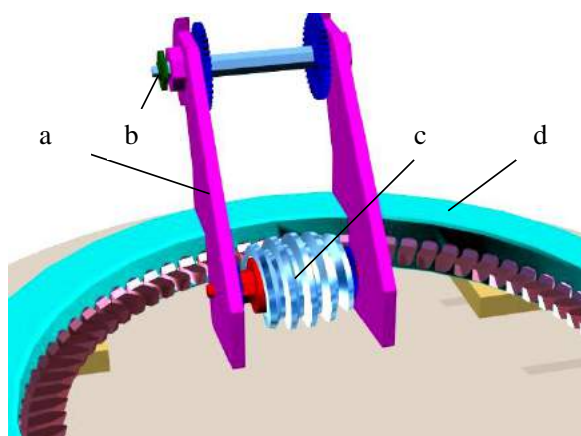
The technological scheme of the drive: a – arm device, b – tool axis, c – semi product of helical worm d – multicutter device [4]
